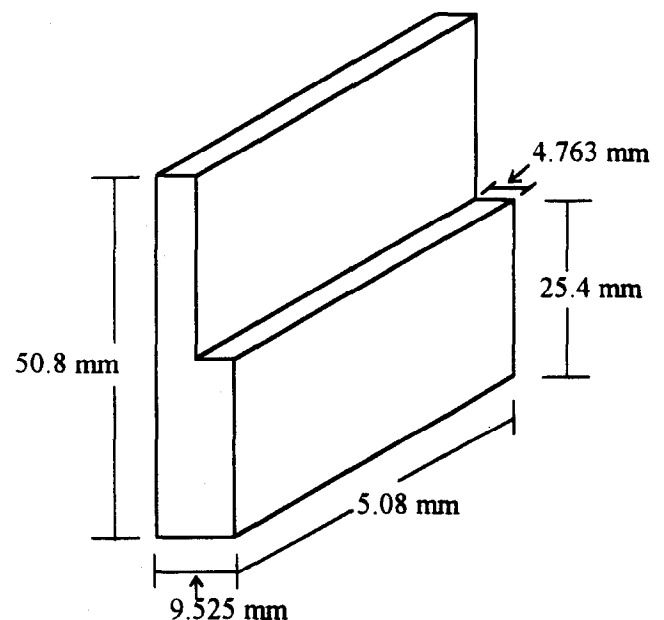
Schematic and dimensions of samples used for compression shear test.
